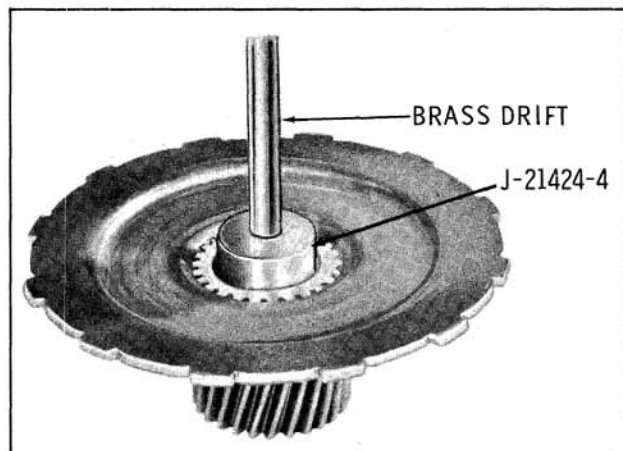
Removing Low Sun Gear and Flange Assembly Bushing
